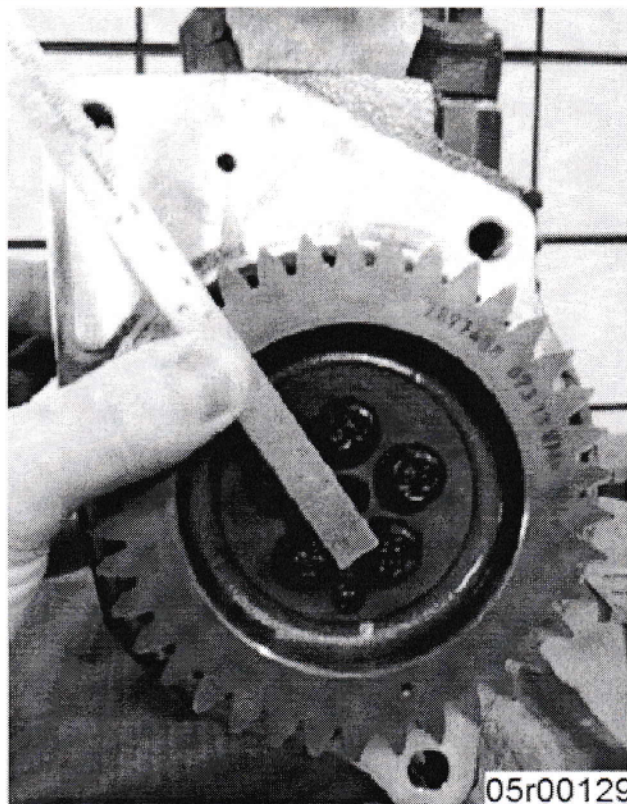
, Fuel Pump Camshaft Center Line and Mounting Hole Center Line Alignment.
